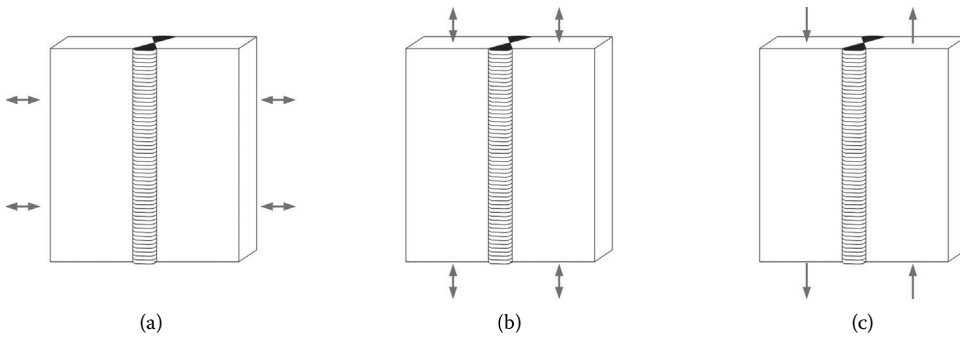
Loading conditions of full penetration groove welds.
